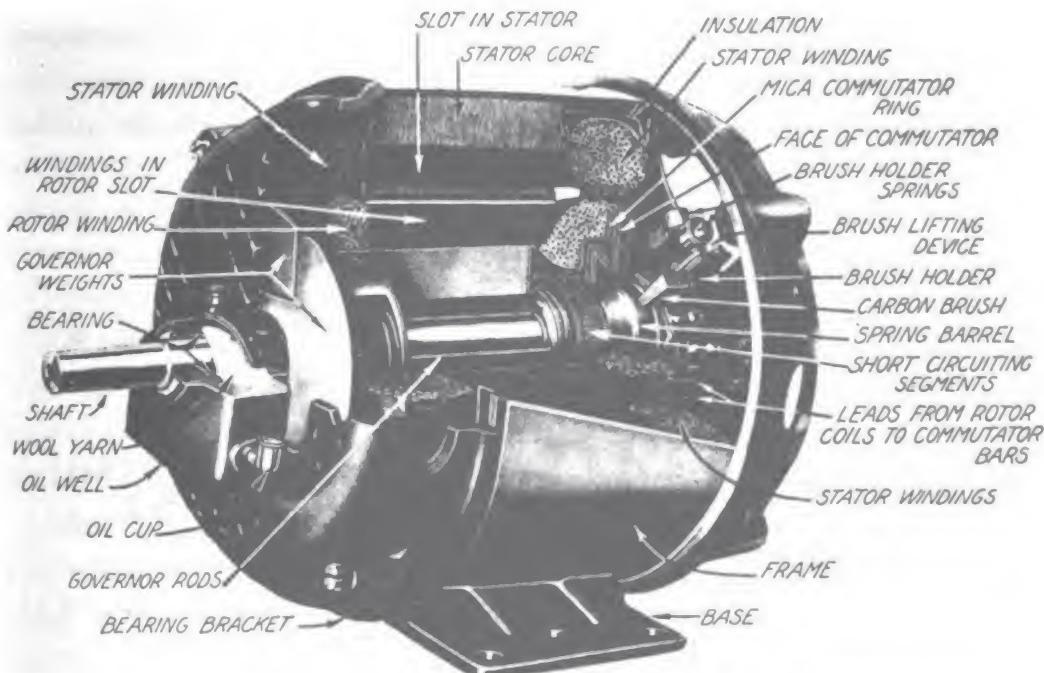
Completely assembled repulsion-start, induction-run motor.
